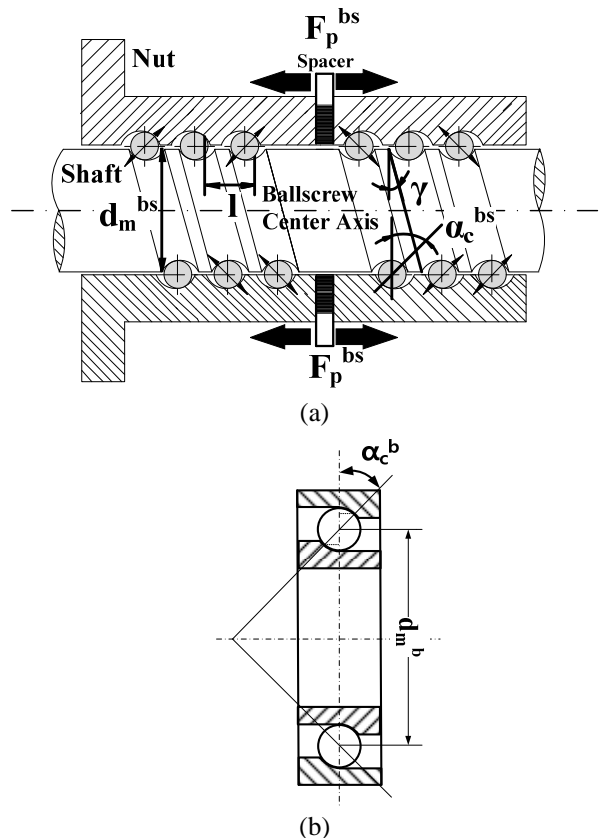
Schematic diagram of (a) ballscrews and (b) angular contact ball bearings
